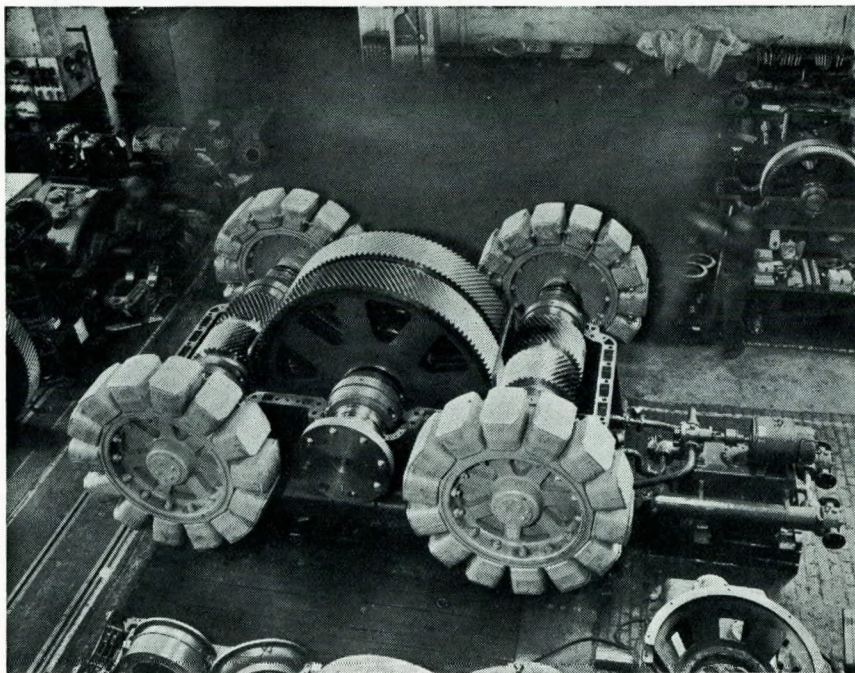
The couplings, pinions and main gear wheel as fitted in the "Dagmar Salen".
